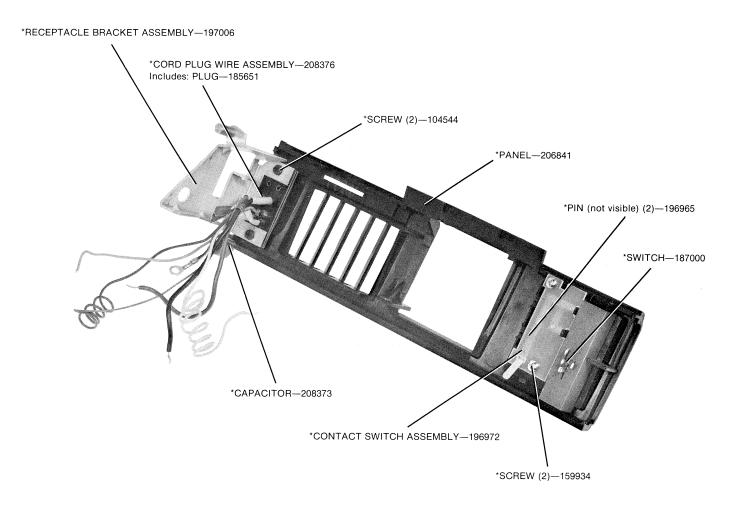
SWITCH PANEL ASSEMBLY—208377
